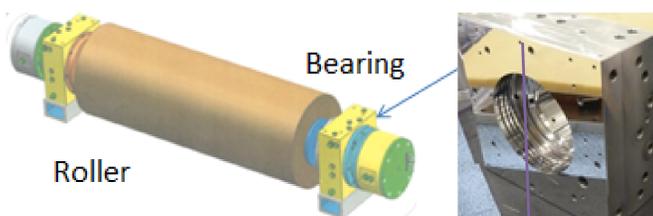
Diamond turned rollers and Hydrostatic bearings & housing
